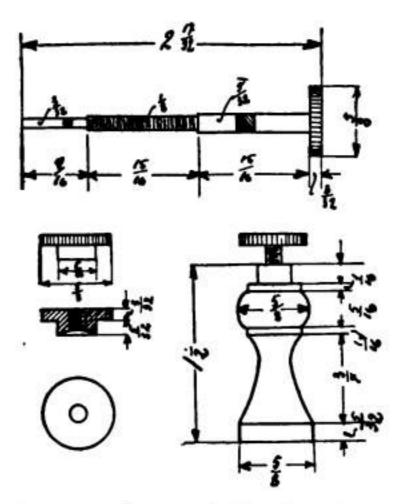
Conductor Plugs, Adjusting Screws, Standards.
